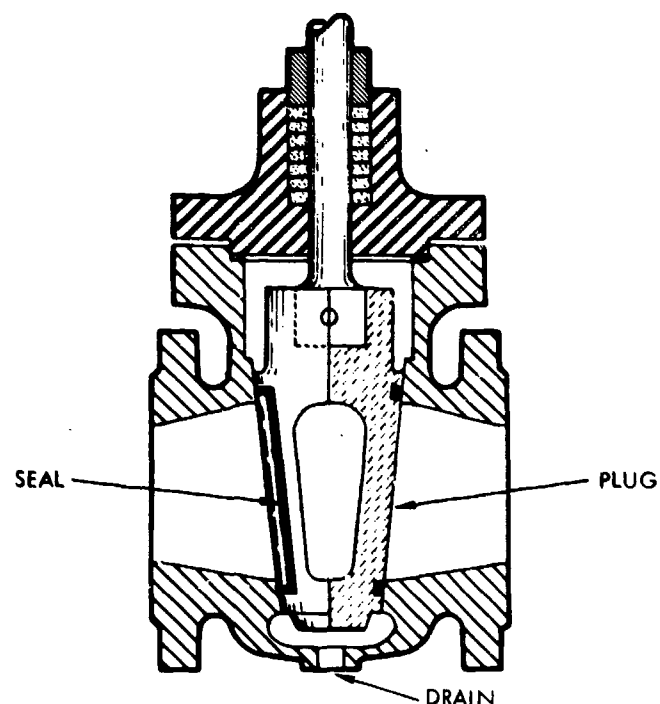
Straight-Through Plug Cock Valve
